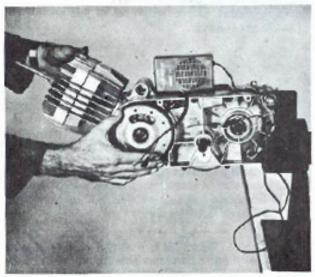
Thread the piston timing tool #15 into the spark plug screw in the cylinder head. Check that the timing advance is 1.80mm (21 degrees) by using the piston timing tool #15. To determine the correct timing, use the timing indicator #16, connected to the magneto, which emits a high buzz/light when the points are open. When the points are open the timing advance should be exactly 1.80mm (21 degrees). Adjust the point gap to 0.4mm (.015) as marked on the flywheel. To adjust the gap loosen the fixing screw-check gap with feeler gauge and retighten screw.
